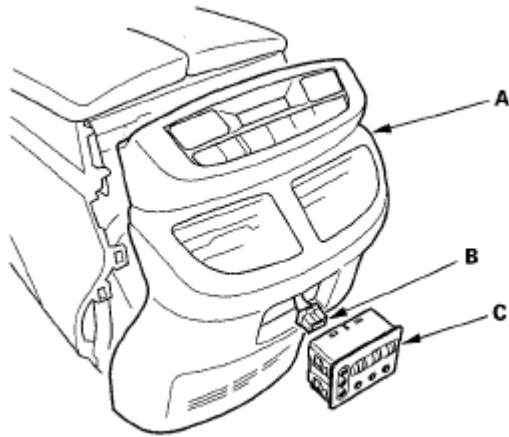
Identifying Console Rear Trim And Auxiliary Jack Assembly
